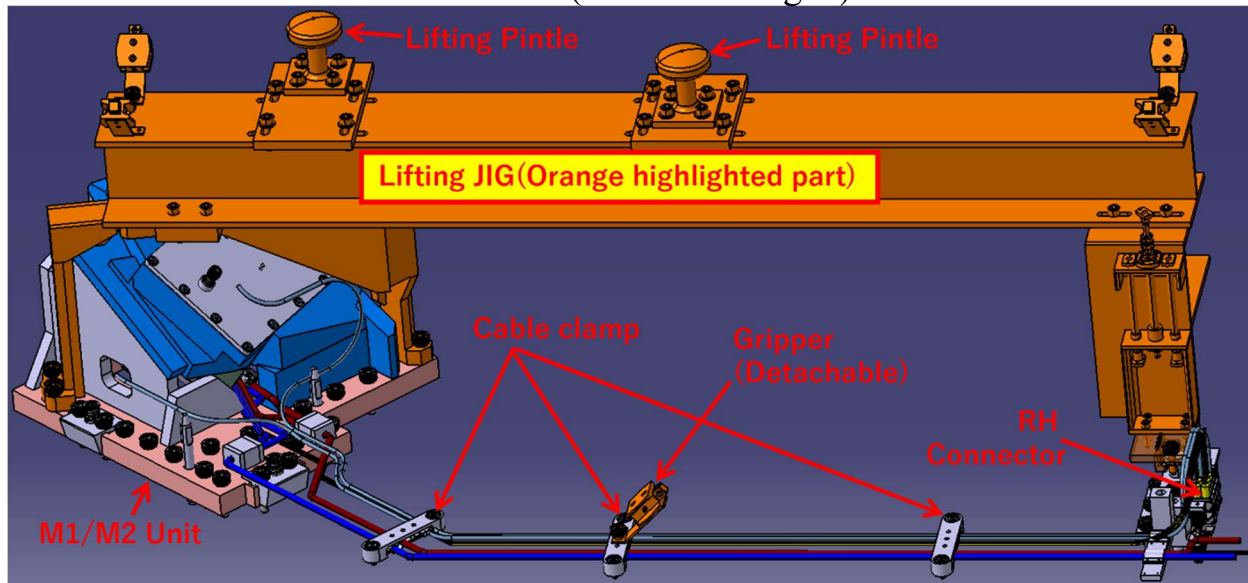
Definition of part names related to M1/M2 unit disassembly.
